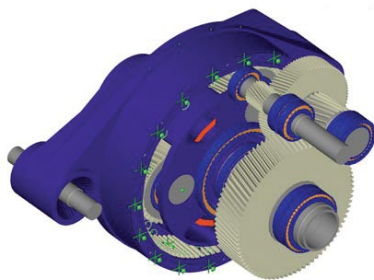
The planetary and parallel gear stages in the fully detailed RomaxDesigner gearbox model.
